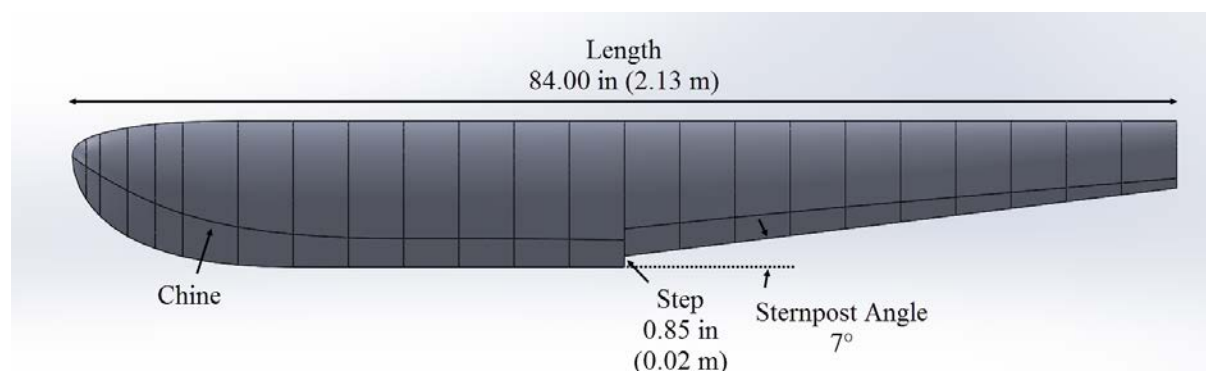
Geometric parameters shown on side view of NACA 57-A Hull CAD model
